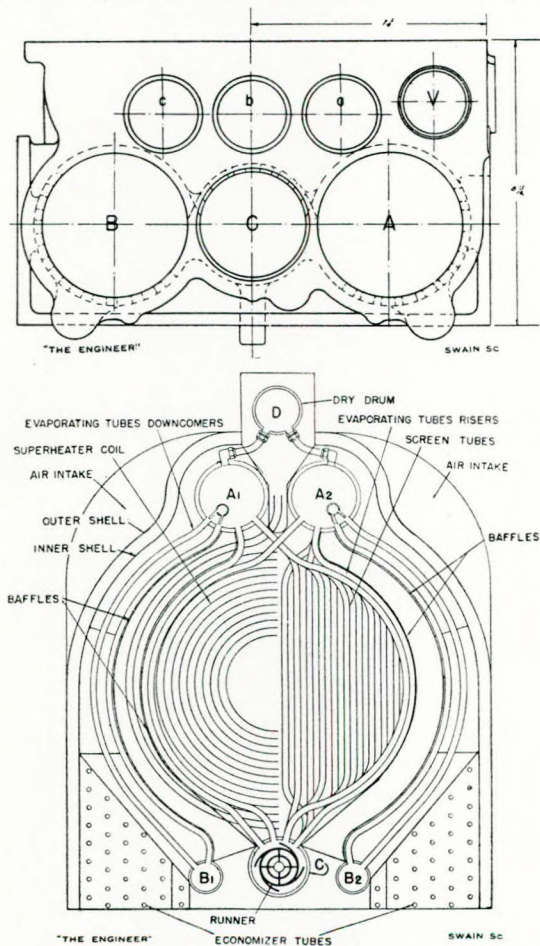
& 4. Cross Sections of Cylinder Block and Boiler.
